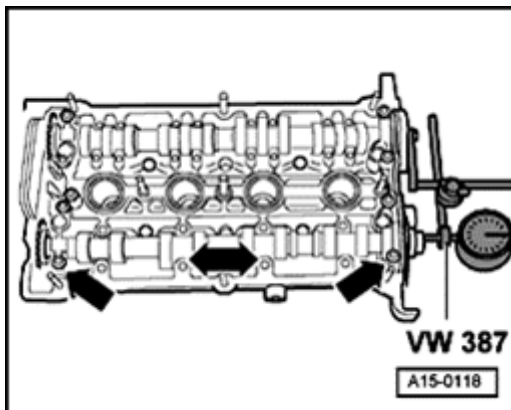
Camshaft Axial Clearance, Checking - Exhaust Camshaft
